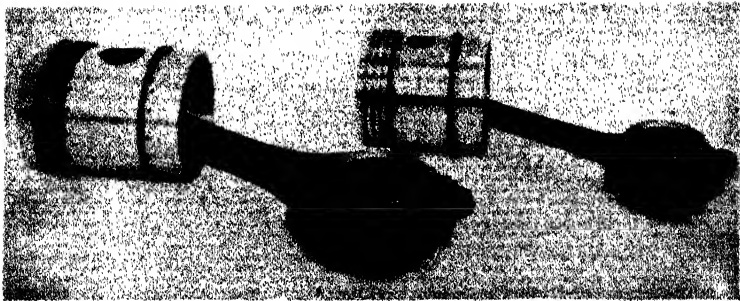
Showing A.E.C. Diesel Piston Assembly (left) and Petrol Engine one (right).
